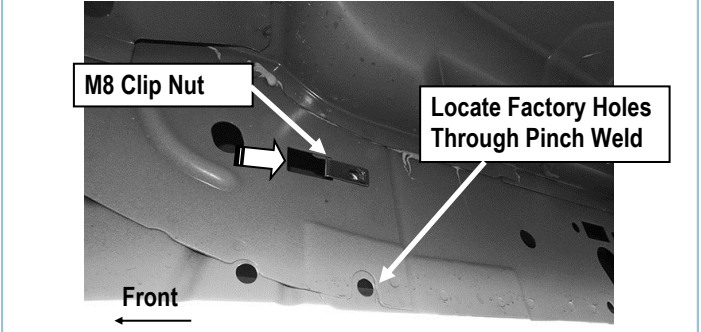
Passenger Side Mounting Area Illustrated For Instruction Purposes
